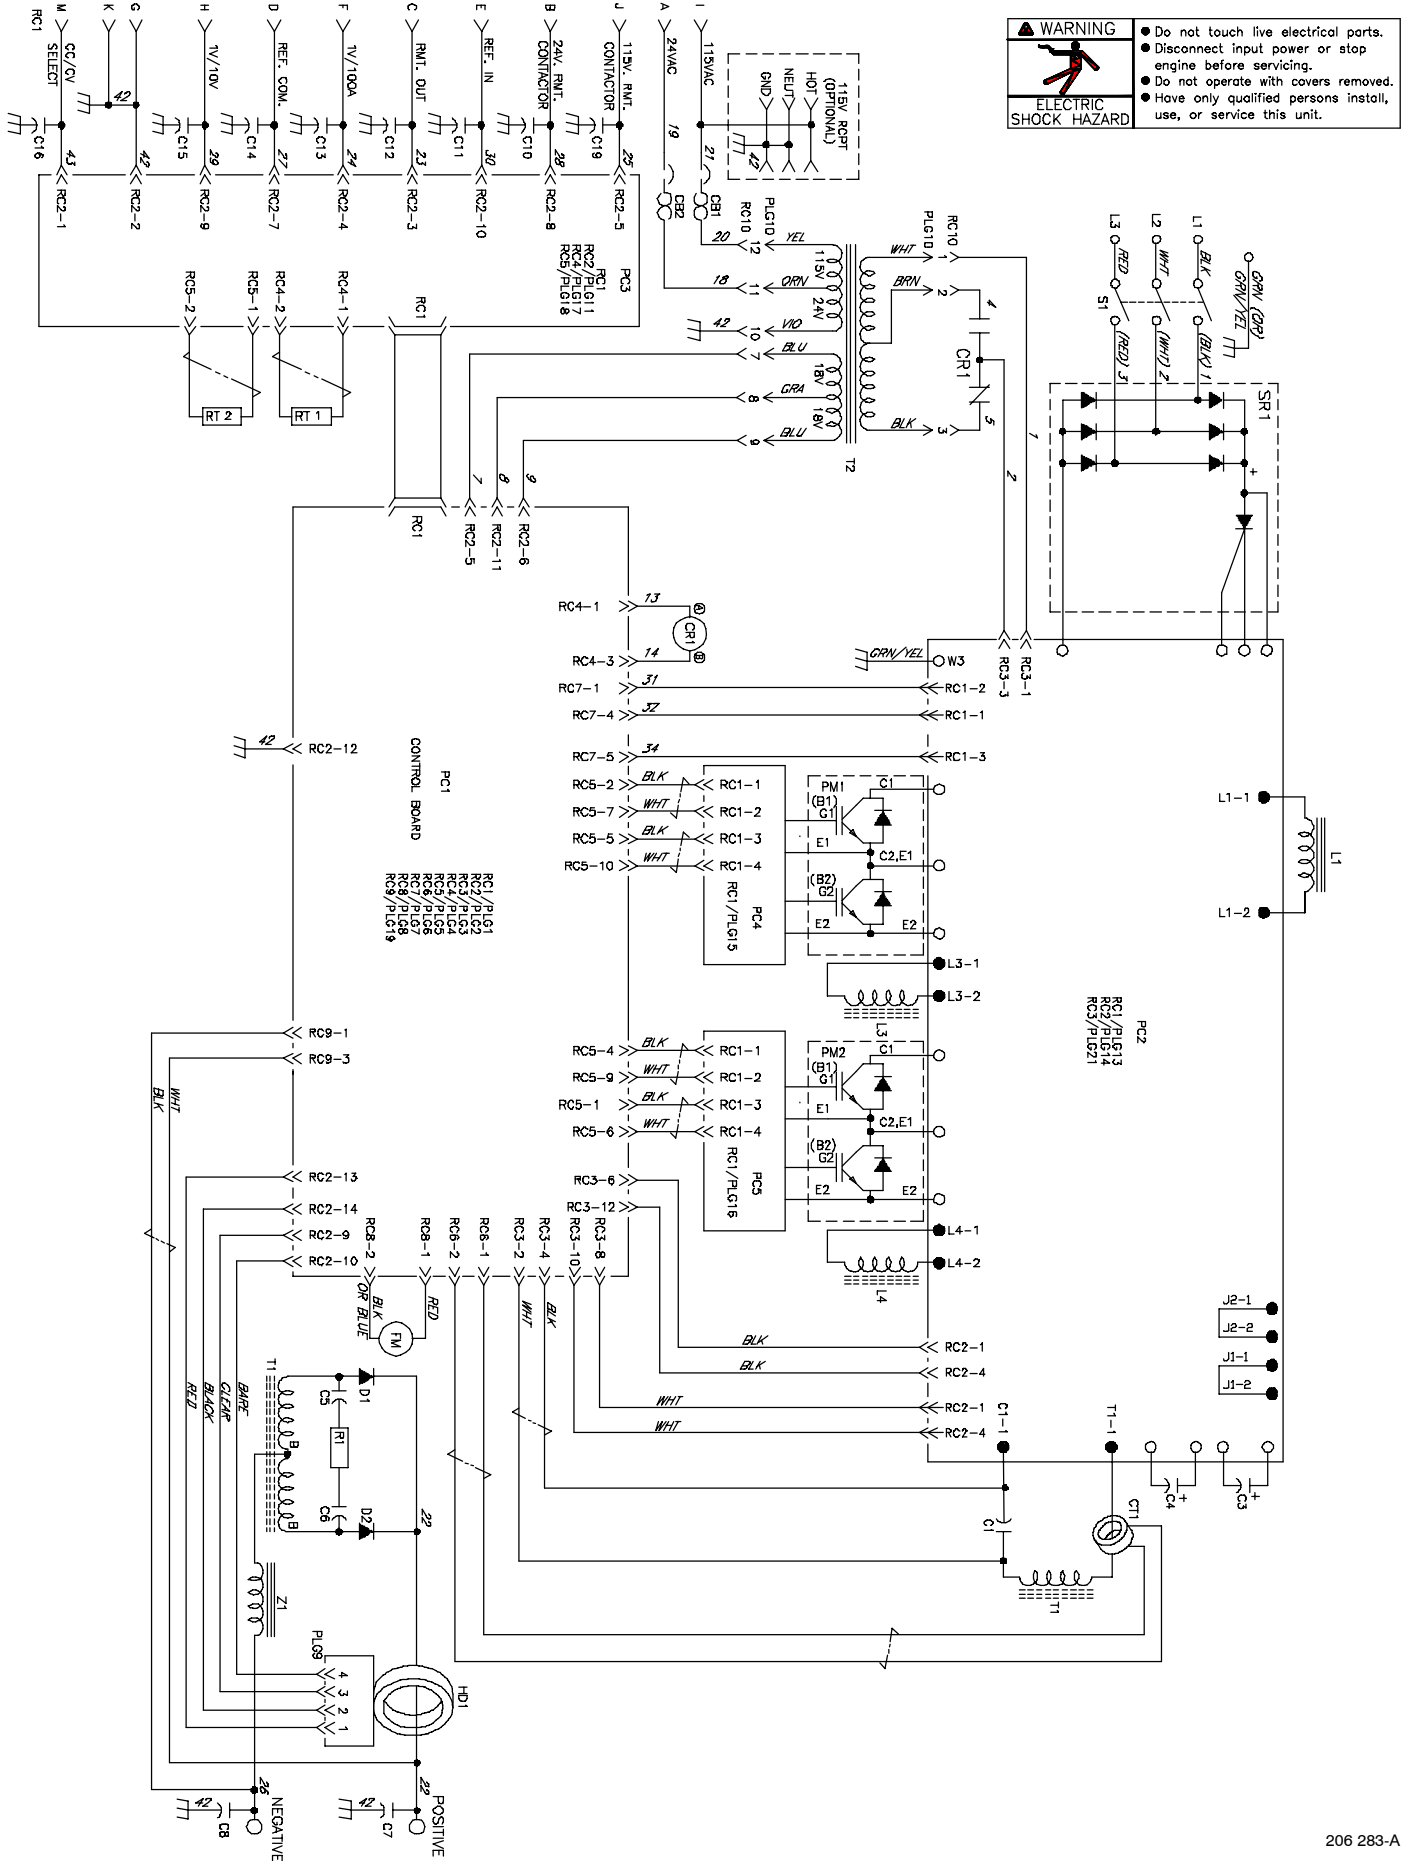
Circuit Diagram For Welding Power Source (460/575 Volt Models)
